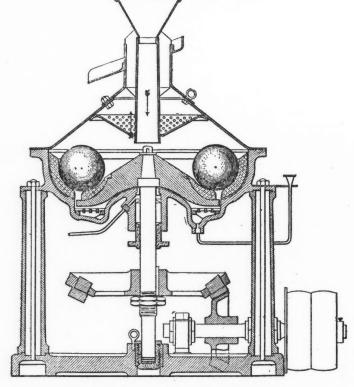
CRAWFORD MILL (SECTIONAL VIEW).
